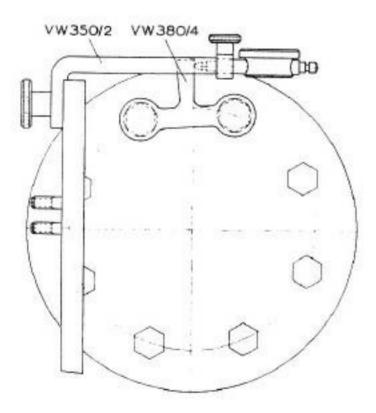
Ring gear rotation being measured. The indicator pin contacts the plastic bracket slipped over the ring gear botts.
